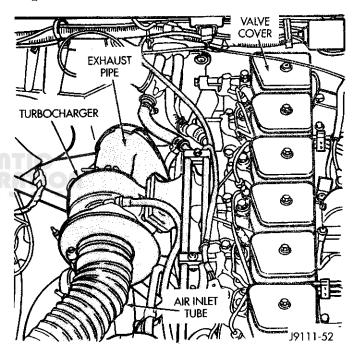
Air Intake Pipe, Exhaust Pipe and Turbocharger
